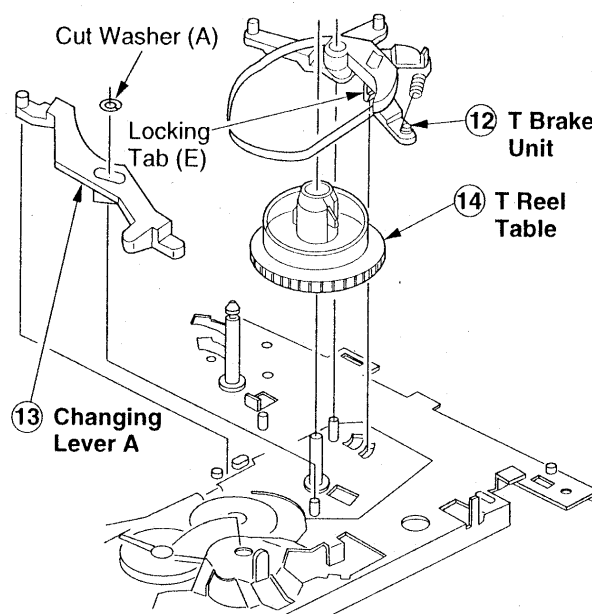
T-Brake/Change Lever (A)/T-Reel Table Removal
